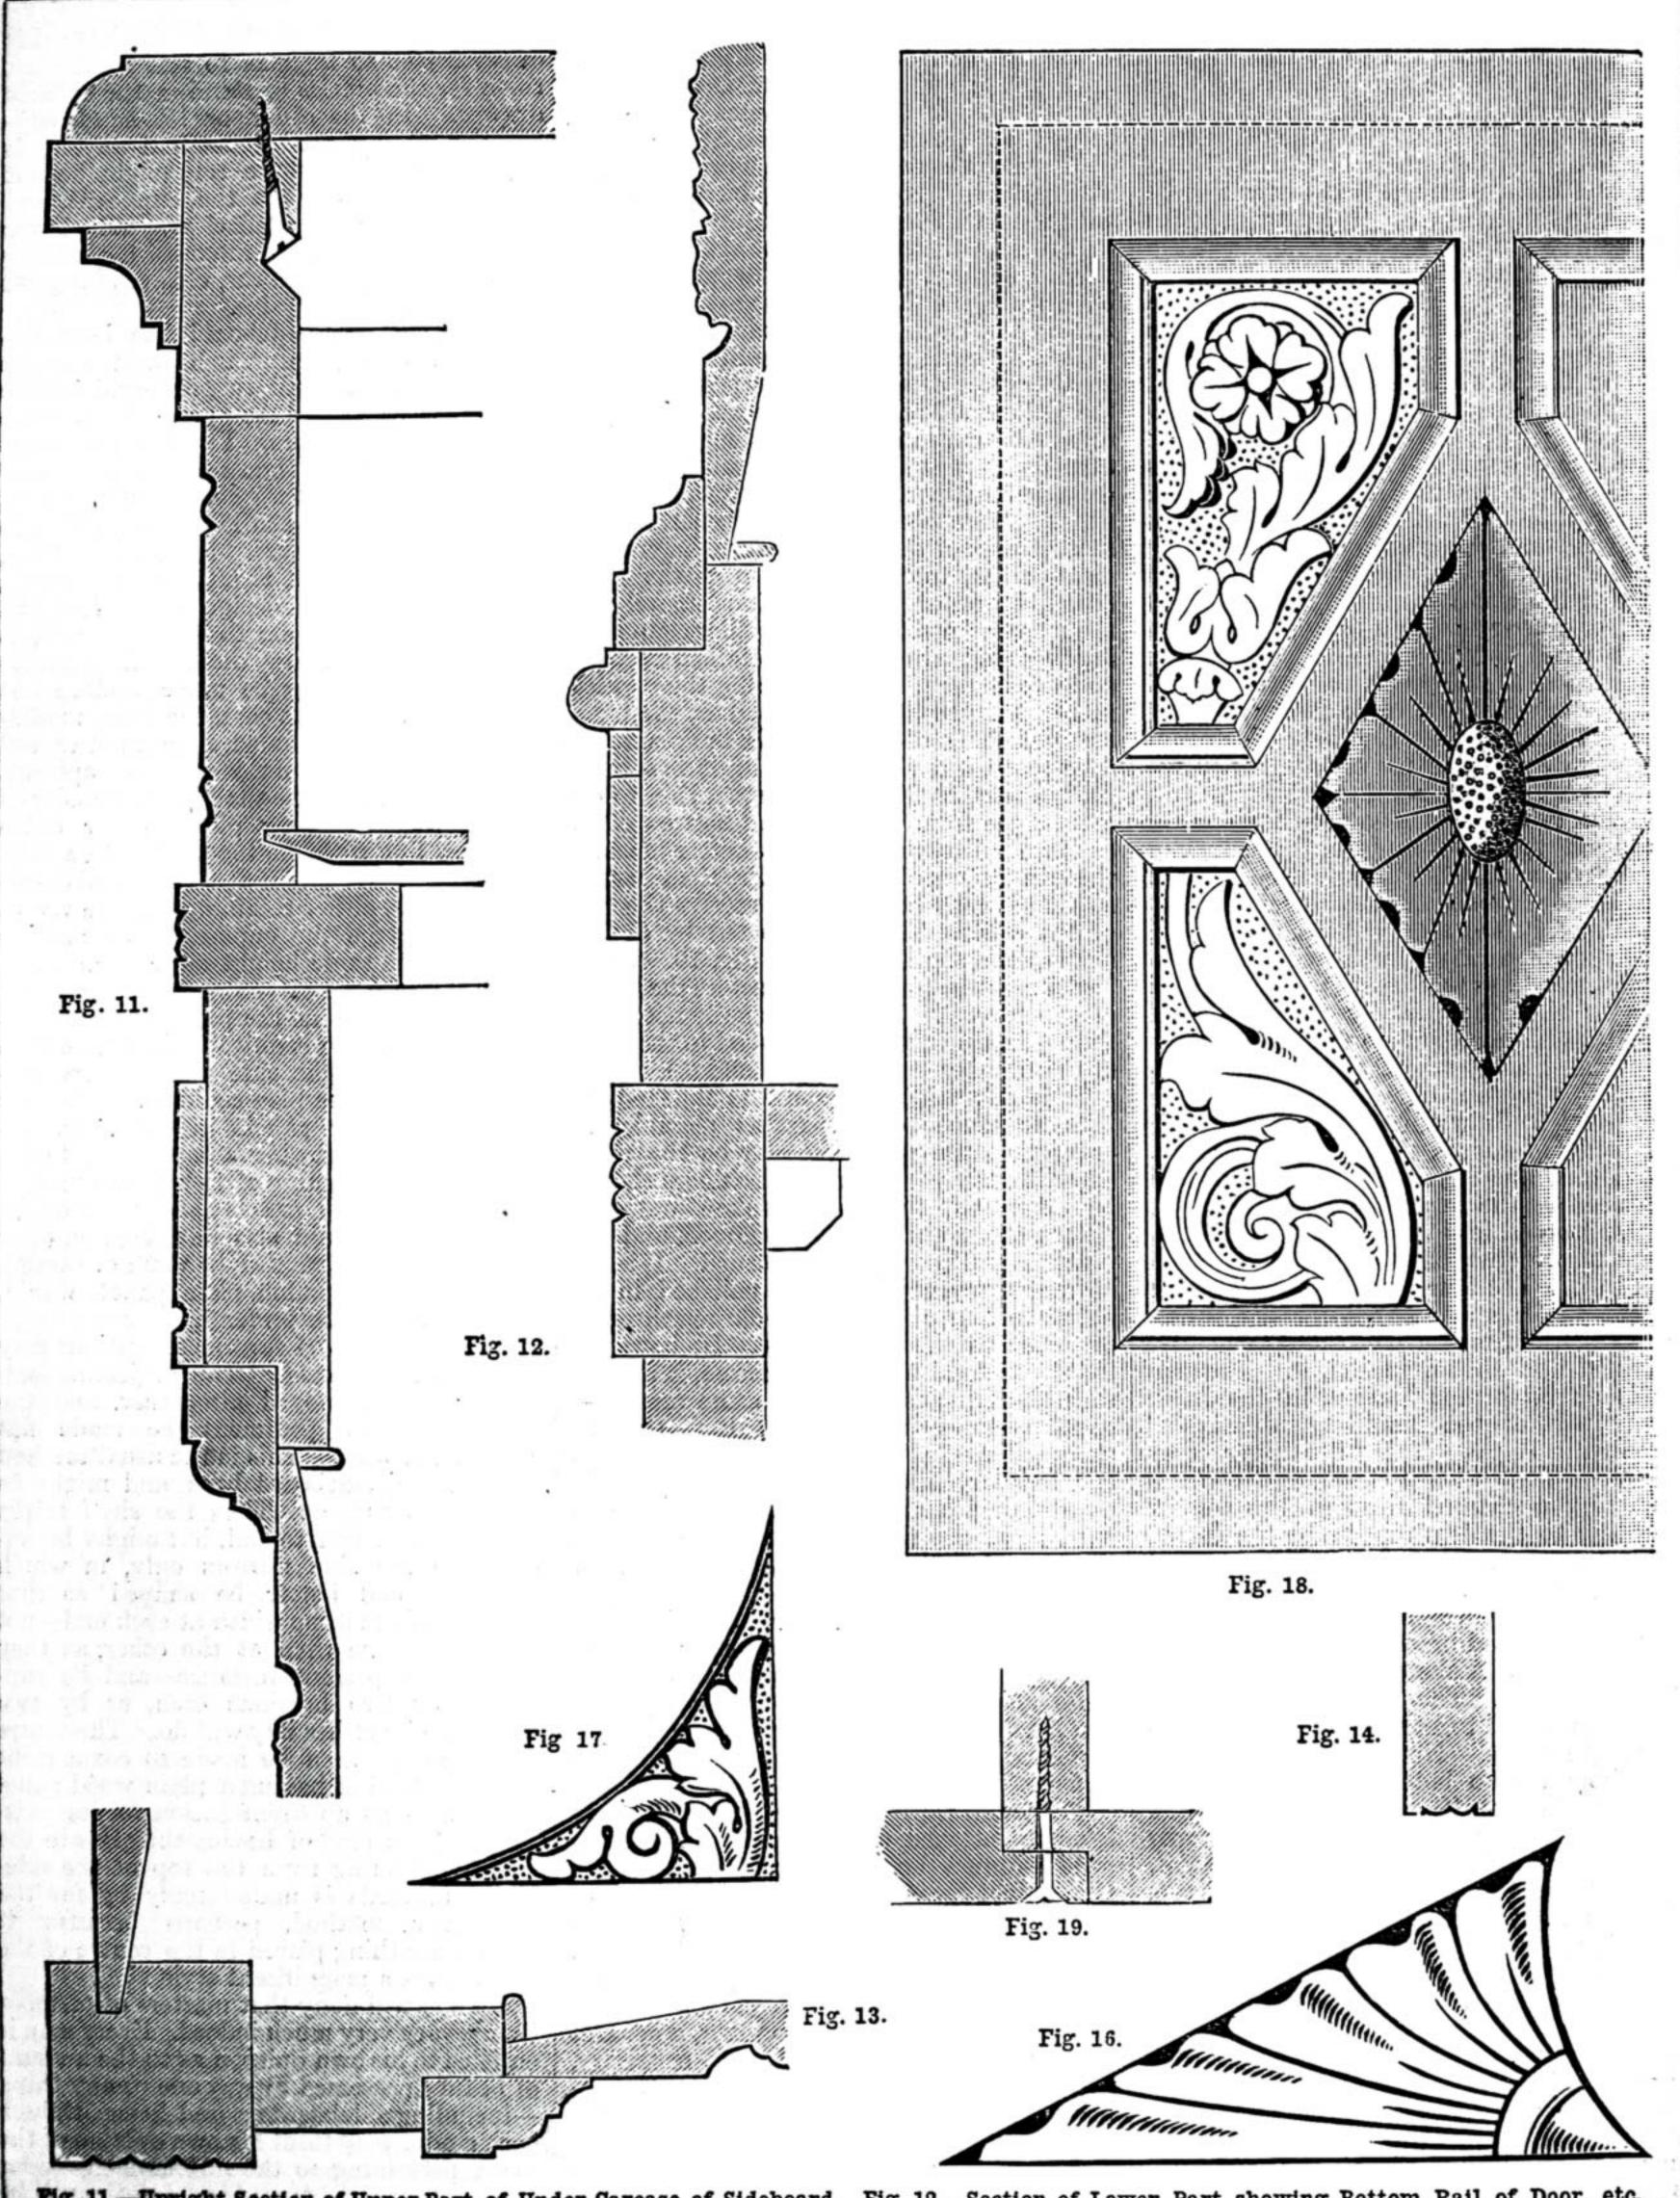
Upright Section of Upper Part of Under Carcase of Sideboard. Fig. 12.—Section of Lower Part showing Bottom Rail of Door, etc. Fig. 13.—Section of Post and Door Stile rebated for Planted Moulding. Fig. 14.—Section showing Beading on Face of Divisions between Cupboards and Recess and Drawers. Fig. 16.—Carving for Side of Pediment. Fig. 17.—Carving in Bracket above Rail over Side Glasses. Fig. 18.—Cupboard Door, showing Panelling and Carving. Fig. 19.—Diagram showing Half Checking of Mahogany and Pine under Inner Gables.
